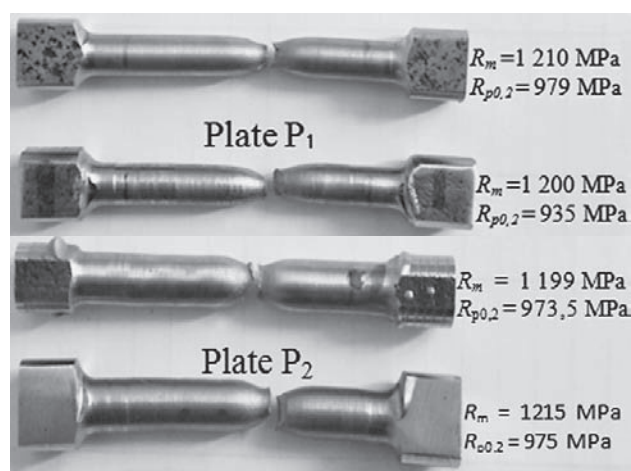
Fractured test tubes in tensile testing of weld properties
